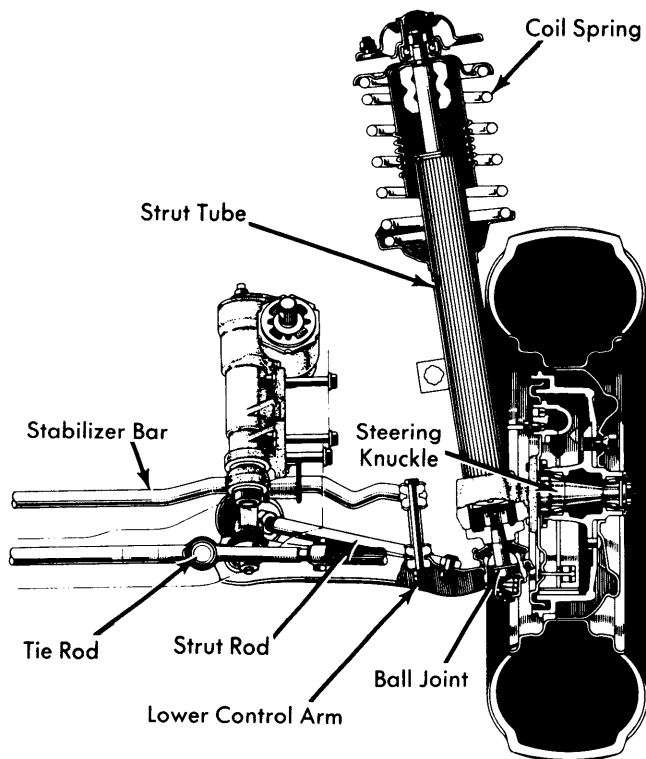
Typical Front Suspension Assembly for Celica/Corolla
